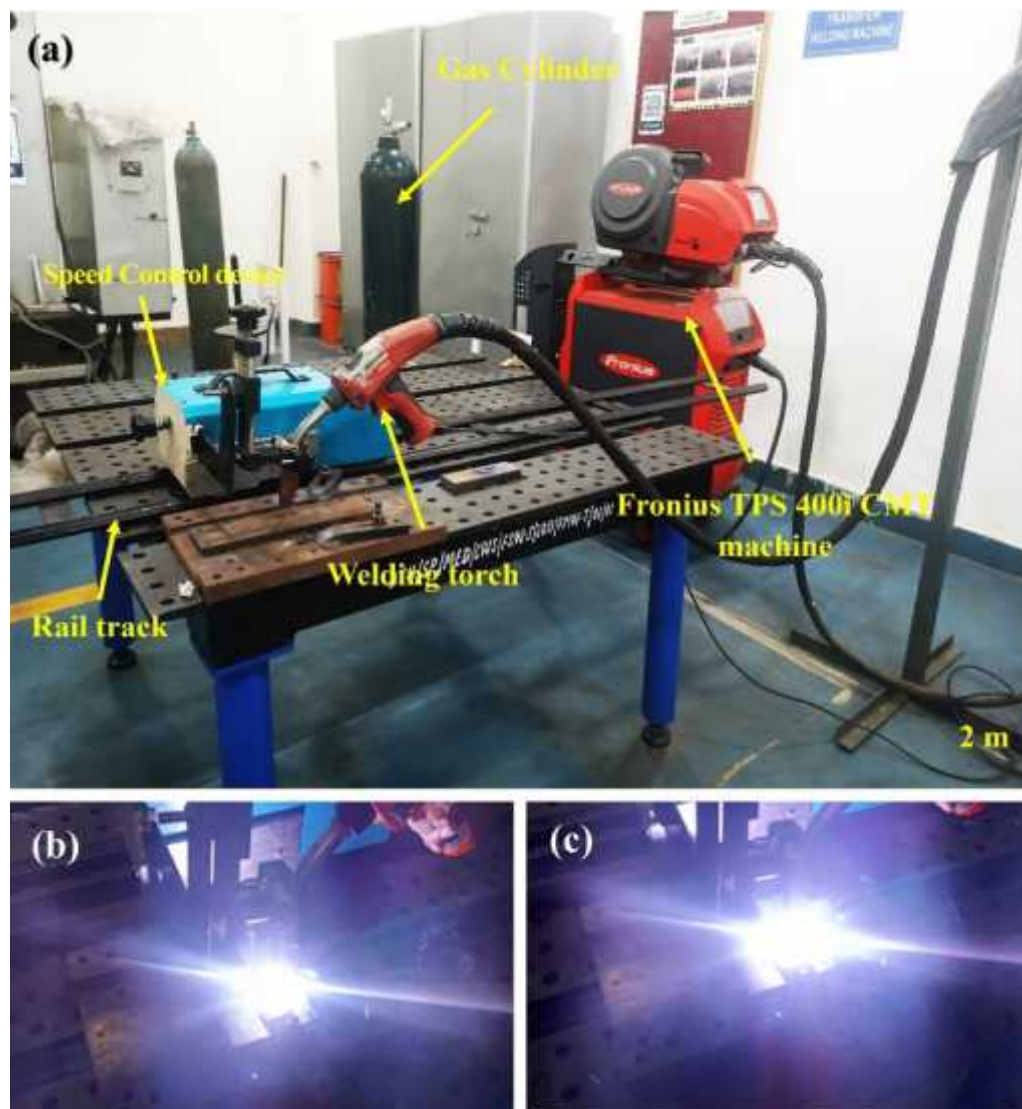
(a) CMT welding machine, (b, c) CMT welding process
